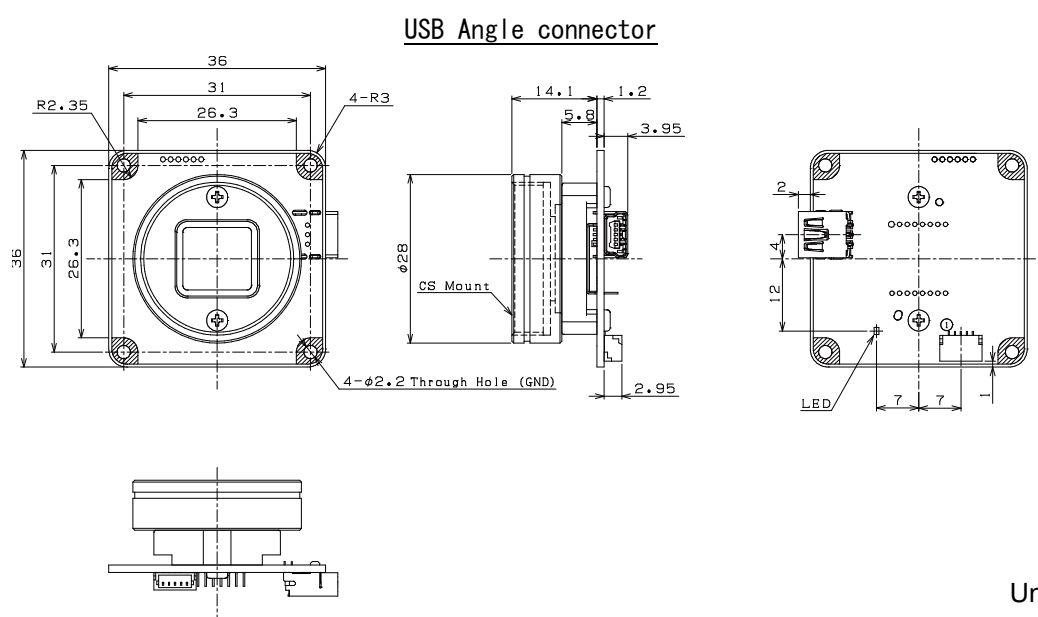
Mechanical dimensions(STC-SCxxxUSB-BxCS)
